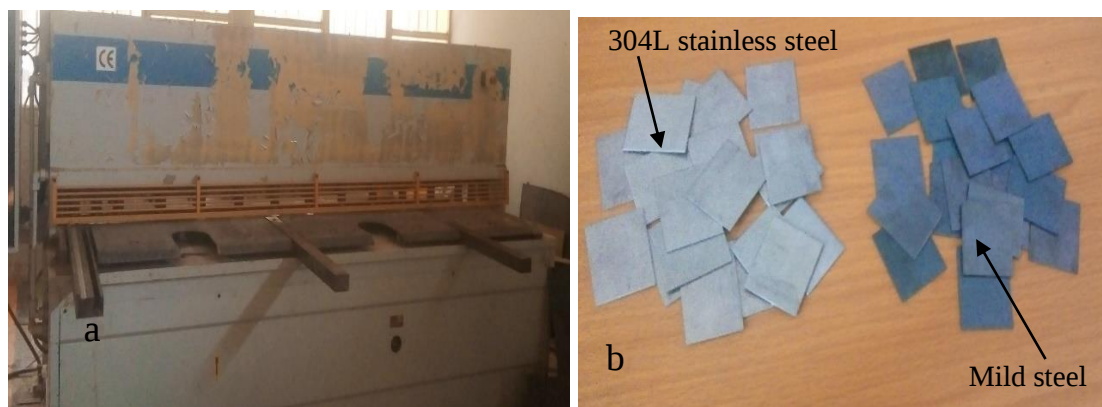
a) Shearing machine (ASTU sheet metal shop), b) prepared specimens using shearing machine.
